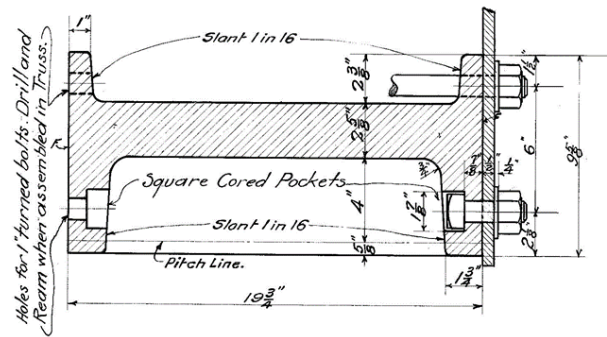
Typical section through rack segment taken from the original design drawings showing fastener arrangement.
